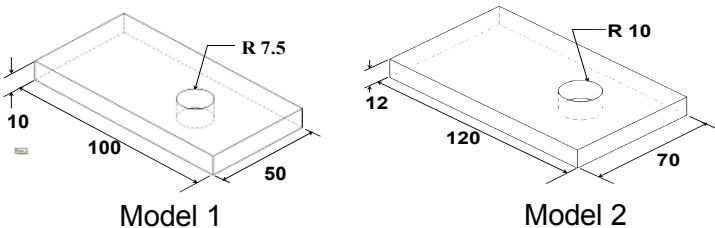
Physical dimensions (parameters) shown in the illustrative example
